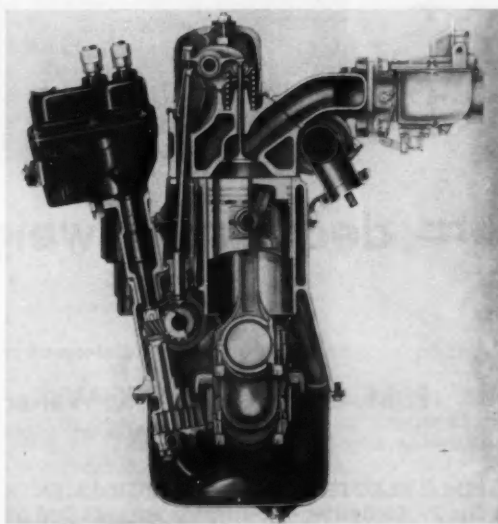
Front view of engine showing the deep-skirt crankcase and tubular exhaust manifold of stainless steel saddled to cylinder head without gaskets.
